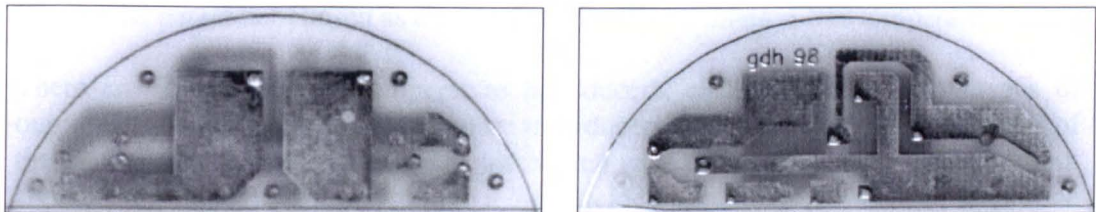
Power-Pack PCB: Terminal Side (left), Component Side (right)
